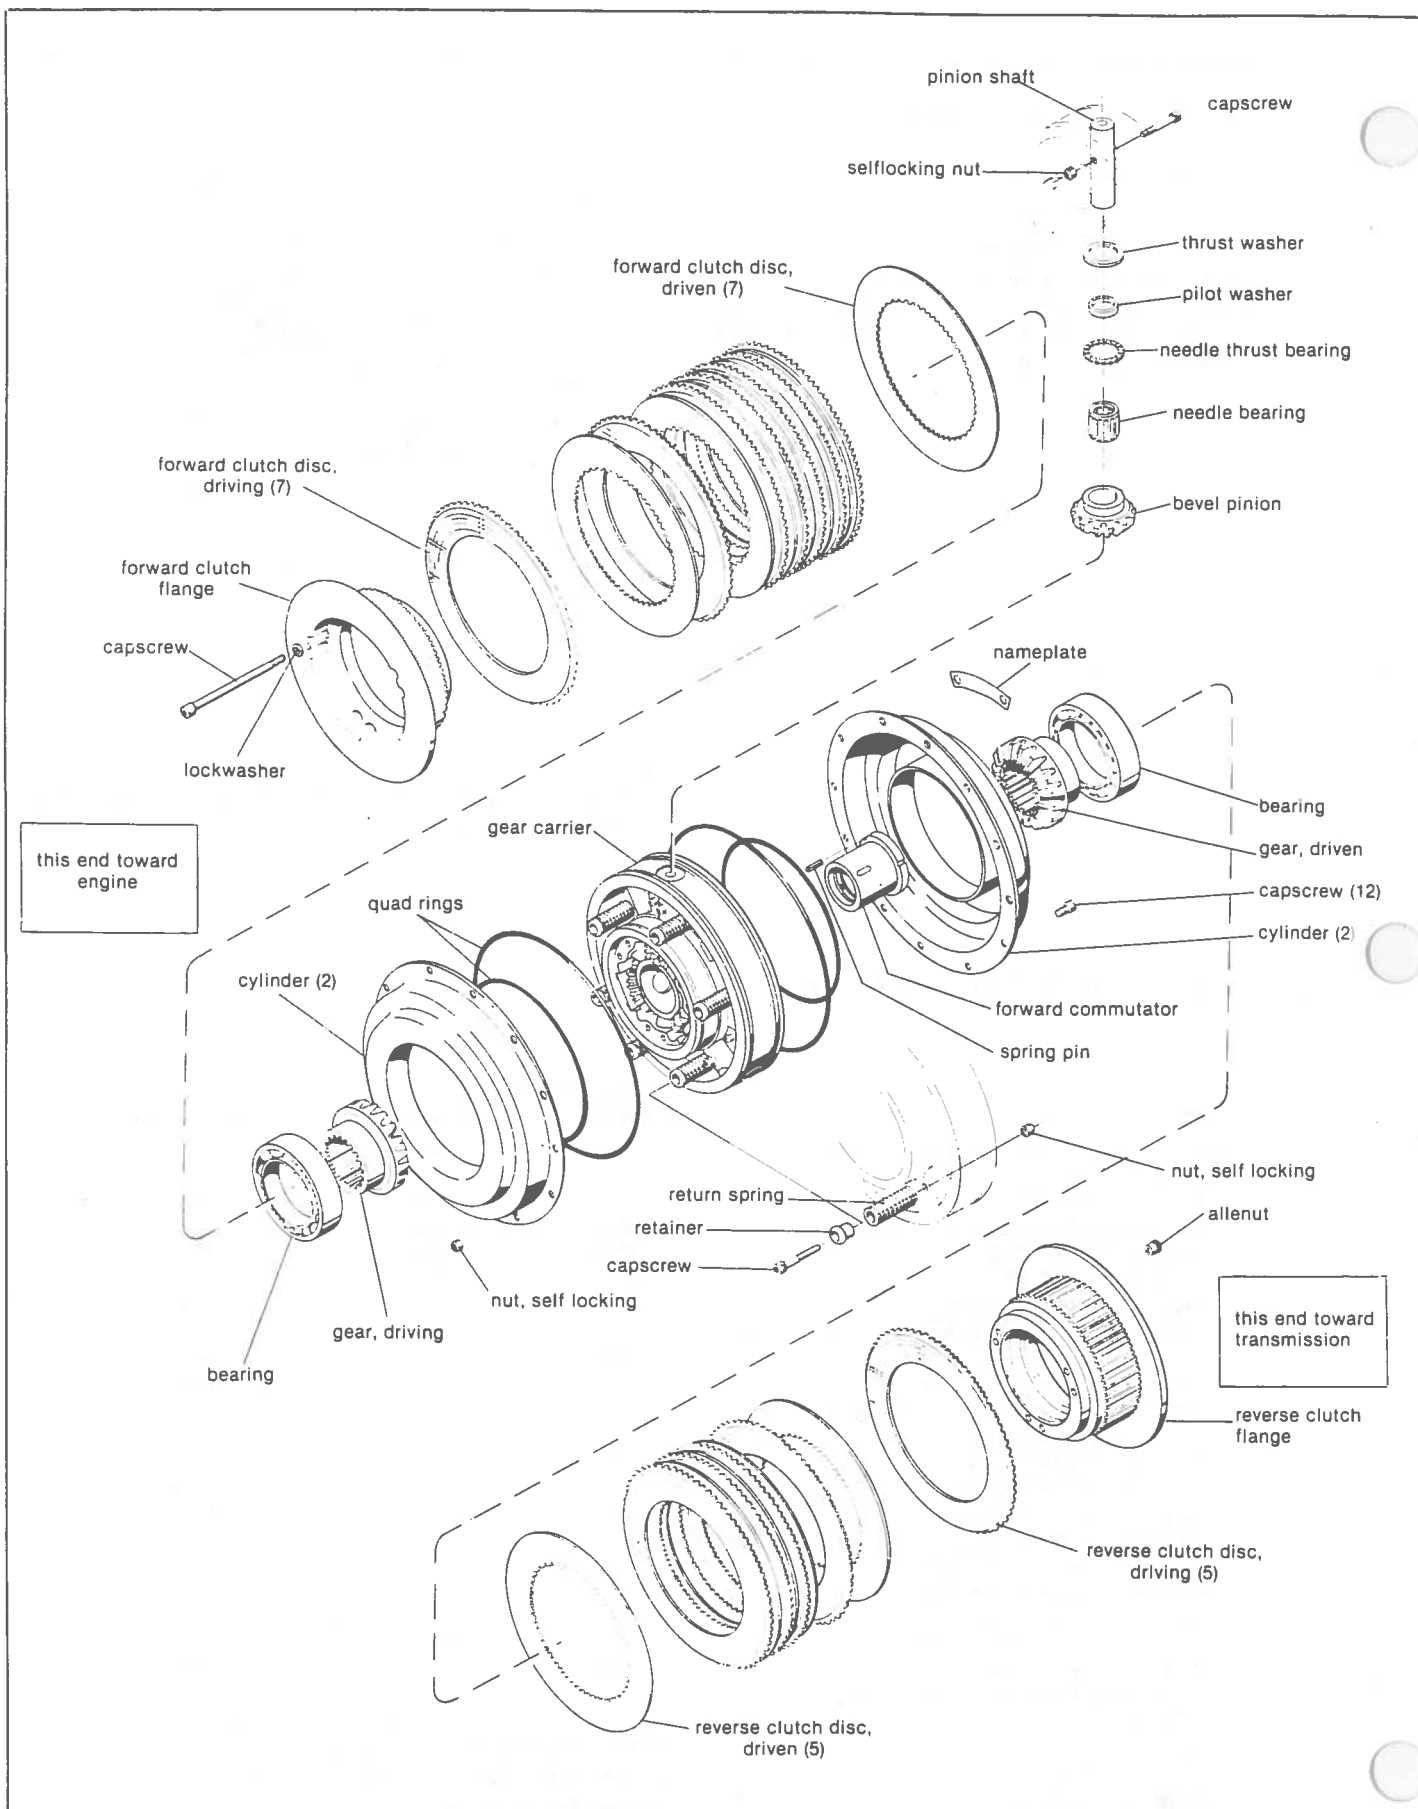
Exploded View of Standard Clutch Assembly No. 1-00100-1000. All other clutches are shown beginning on p. 41.
